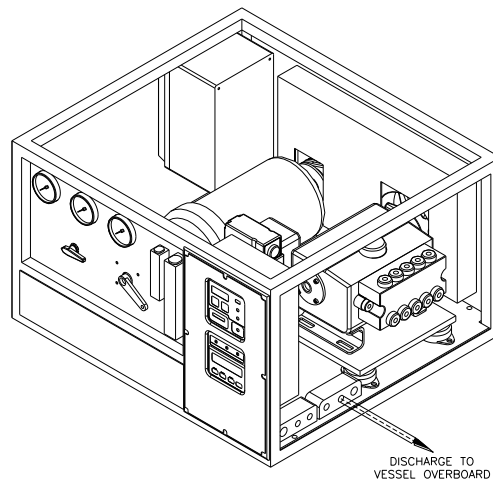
Pure Water SEMI-MODULAR Brine Connection Overboard.
